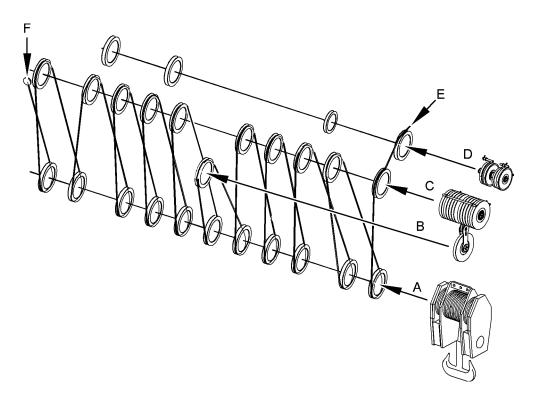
2821 boom head section rope reeving system (load position 2)
